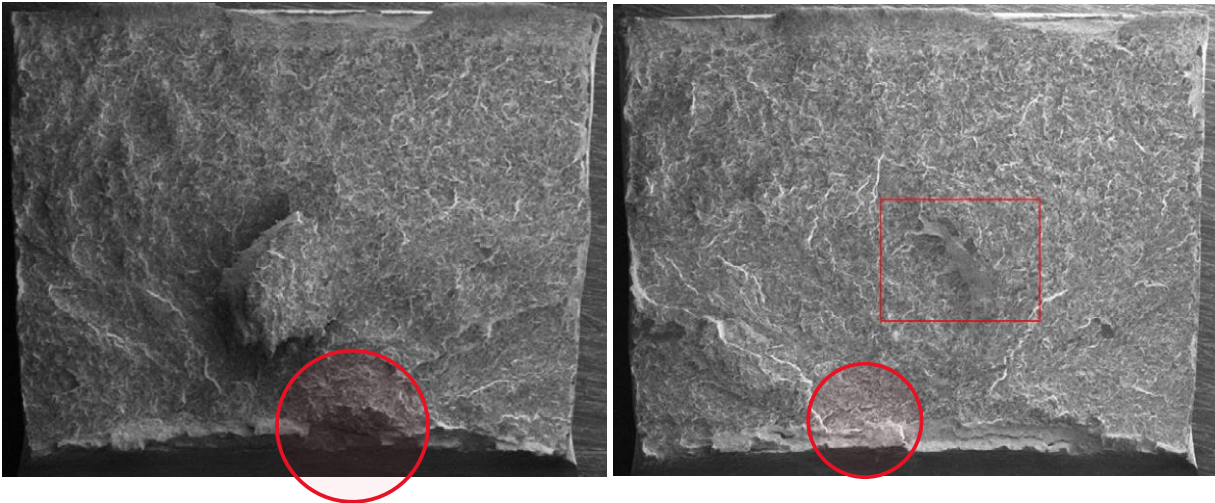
Left and right fracture surface of irradiated Charpy-V specimen C28, showing predominantly cleavage fracture. There is a short region of ductile tearing, prior to cleavage, at the notch root. The primary cleavage fracture initiation region is marked by a red circle. The fracture surface is rough and due to different fracture planes, a region close to the center of the specimen, has fractured by shear, resulting in ductile fracture. This ductile fracture is due to crack plane mis-orientation and is not an indication of low upper shelf toughness. Cleavage initiation is in a region without special features.
